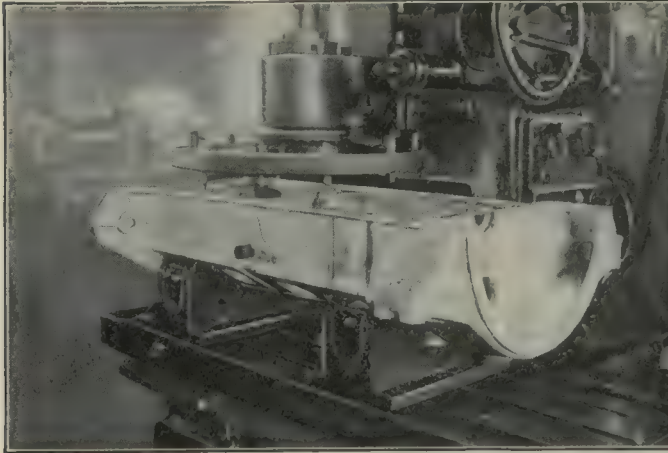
MACHINING PARTING-LINE SURFACE ON THE CRANK CASE
